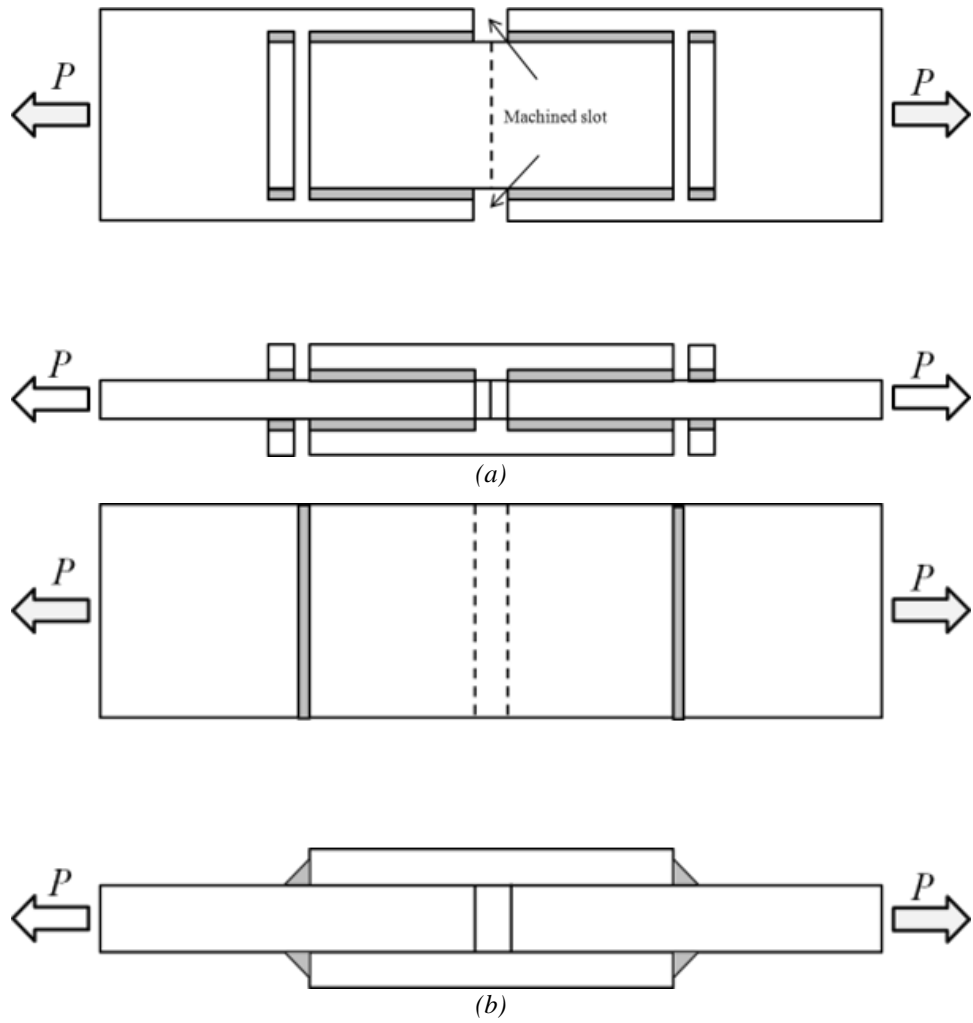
Standard fillet-welded shear testing specimens: (a) longitudinal shear loaded; (b) transverse shear loaded
